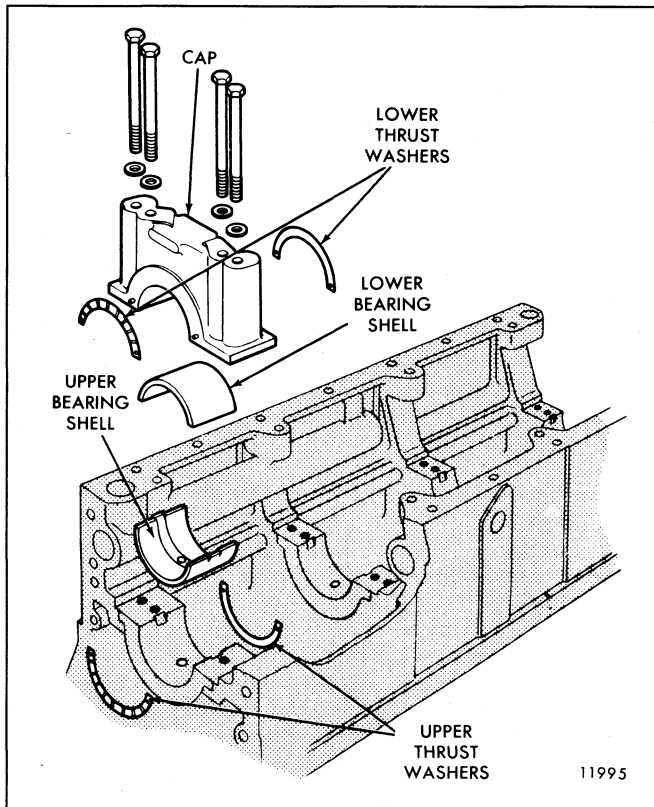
Main Bearing Shells, Bearing Caps and Crankshaft Thrust Washers
